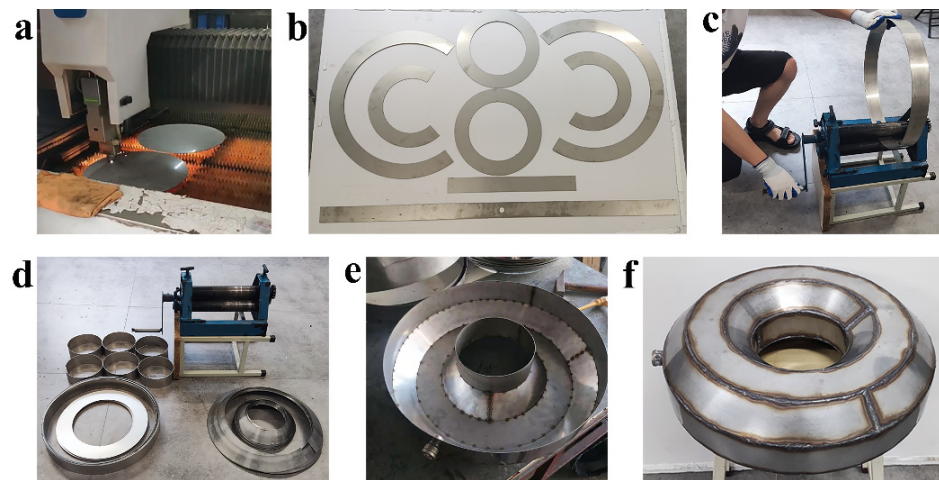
Manufacturing flowchart of toroidal pressure hull with discrete octagonal cross-section: (a) blank cutting, (b) cut blank inspecting, (c) cut blank bending, (d) bent blank inspecting, (e) bent blank assembling, and (f) bent blank welding.
